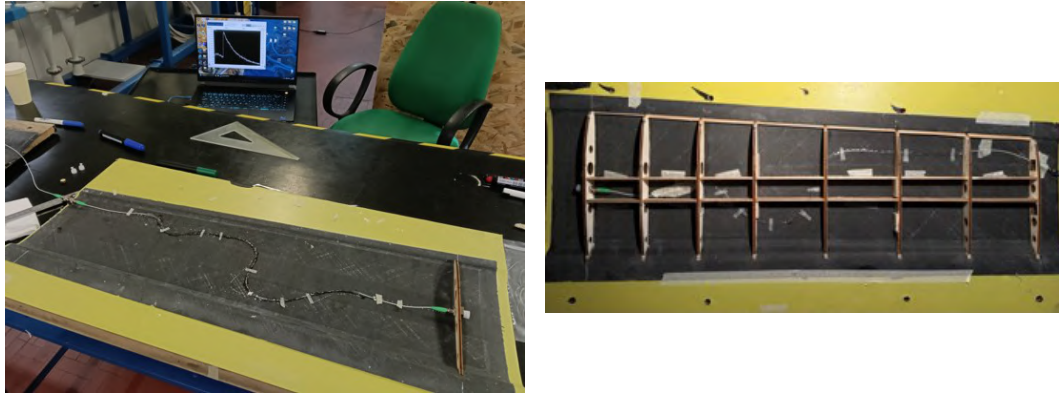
Fiber bonding process on the inner surface of the wing skin.
